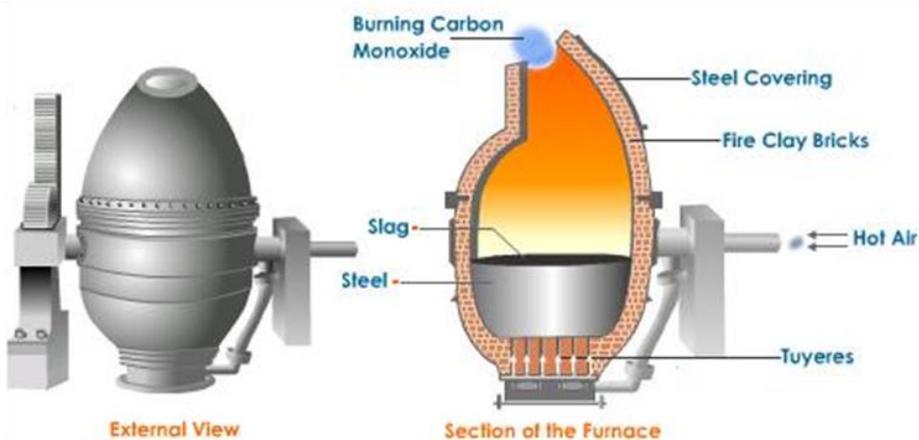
Bessemer Steelmaking Process (illustration of furnace) [142]
